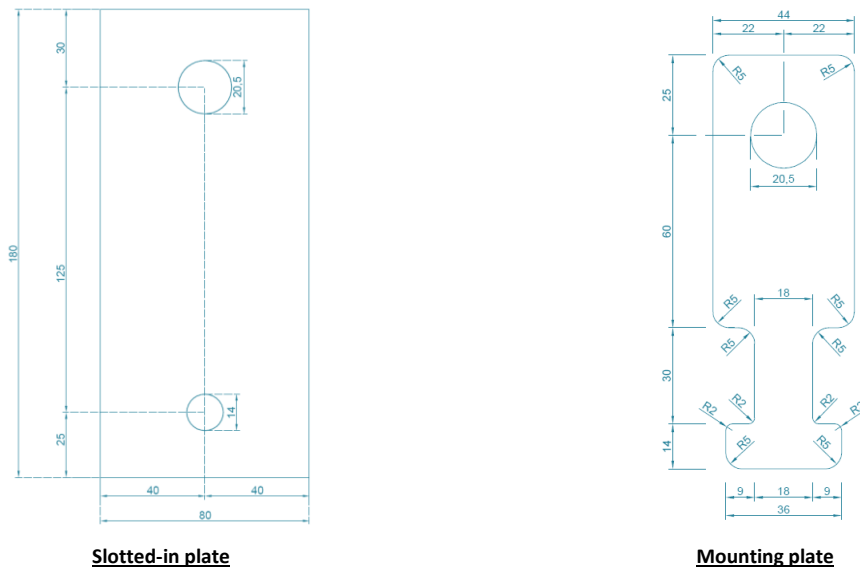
Slotted-in and mounting plates with enlarged 20.5mm holes
